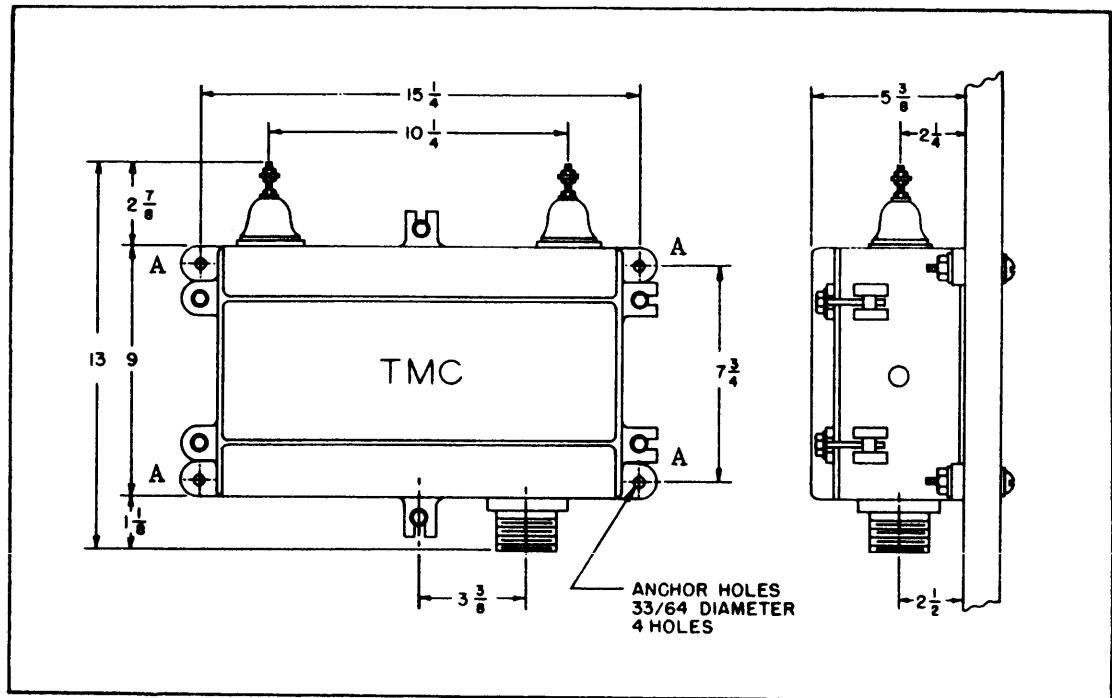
Dimensional Outline and Mounting, Model TRC-3500
